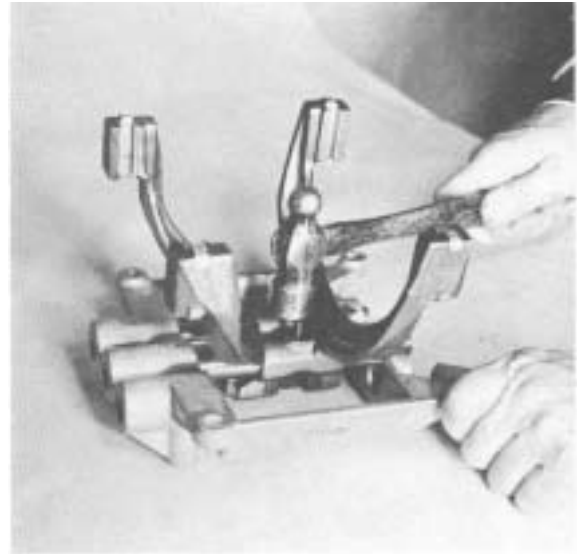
Install 2nd & 3rd shift fork to shift rod roll pin. Move rod to neutral.
